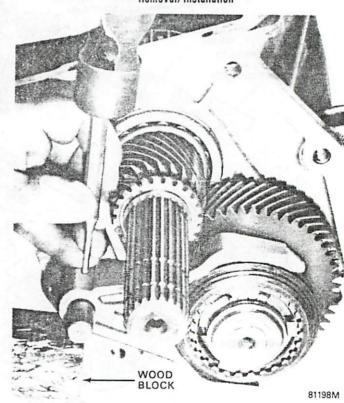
B-42 Fifth Gearshift Fork Roll Pin Removal/Installation
